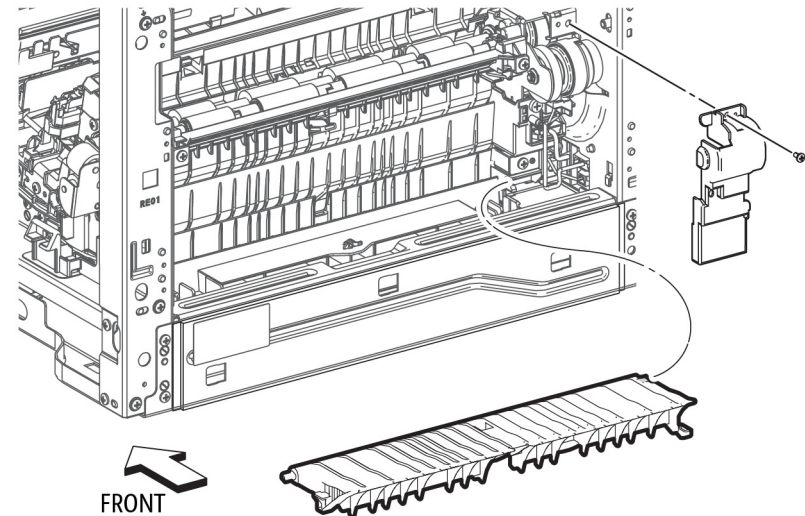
Remove the Rear Duplex Cover and Lower Duplex Chute
